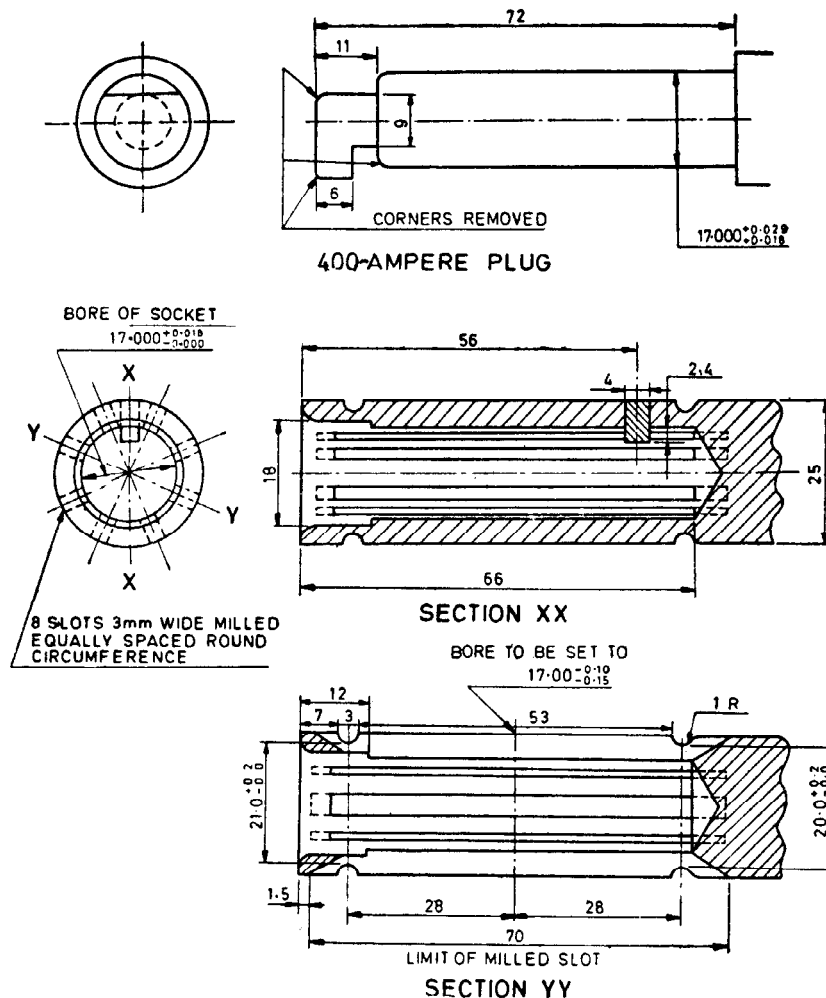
B BASIC DESIGN OF 400-AMPERE PLUG AND SOCKET, TYPE A
